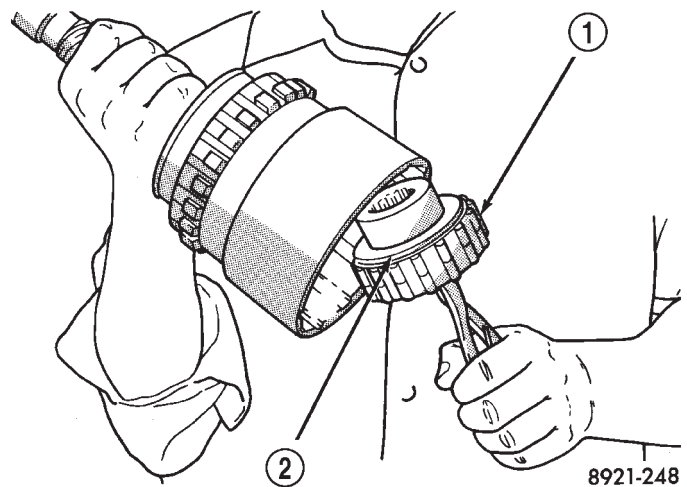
Overrunning Clutch Assembly Removal/Installation
